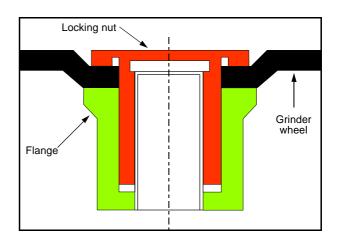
Correct Mounting of Wheel (less than 178 mm dia)
